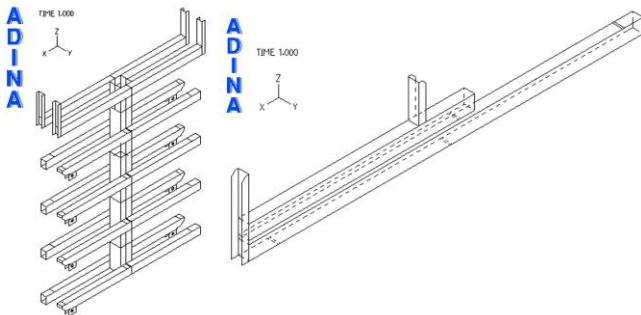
The geometry of the rack bearing part (left) and the rack arm (right)
